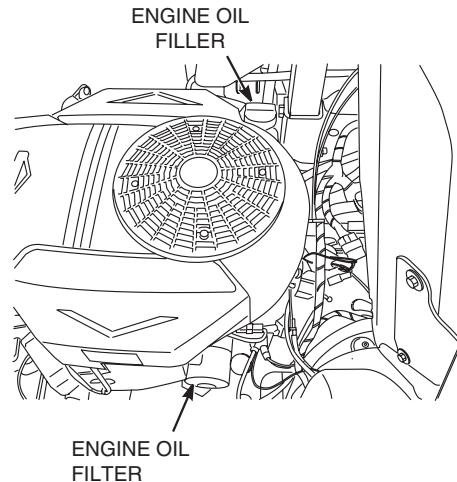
Briggs & Stratton Engine Oil Fill/Dipstick, Filter and Drain Locations
